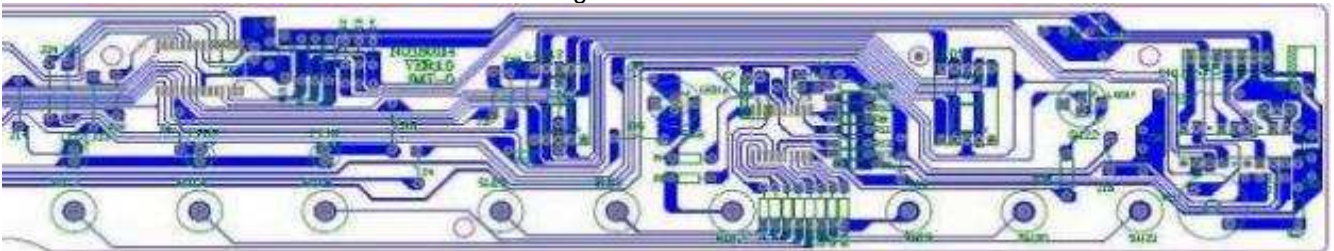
12 - PCB layout of Control PCB for models C74E-BBBC01 and C74E-BBBC02
